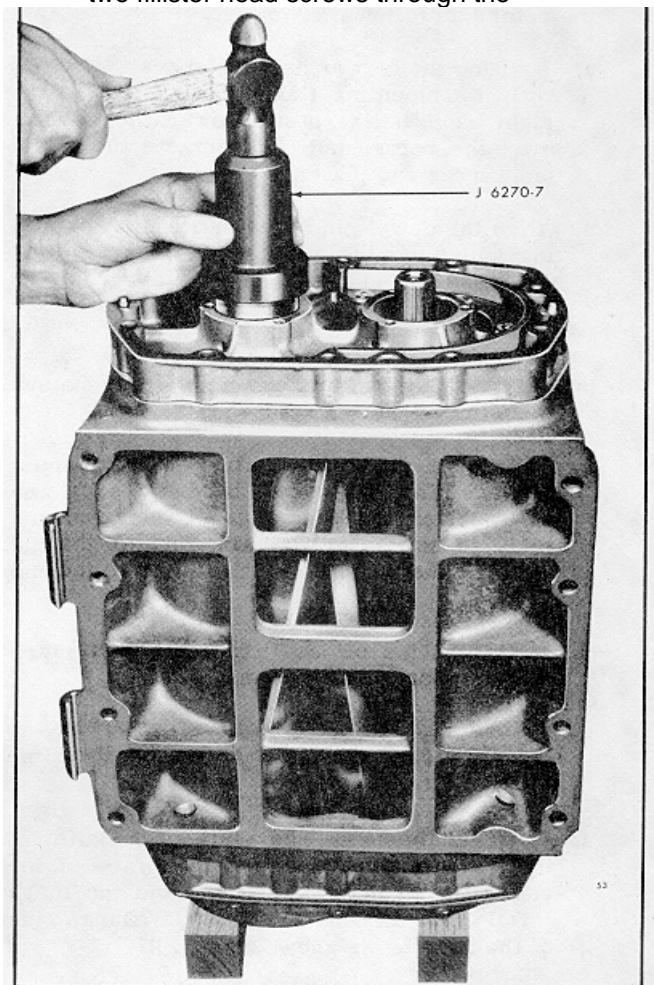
Installing Ball Bearing on Rotor Shaft and in Rear End Plate
